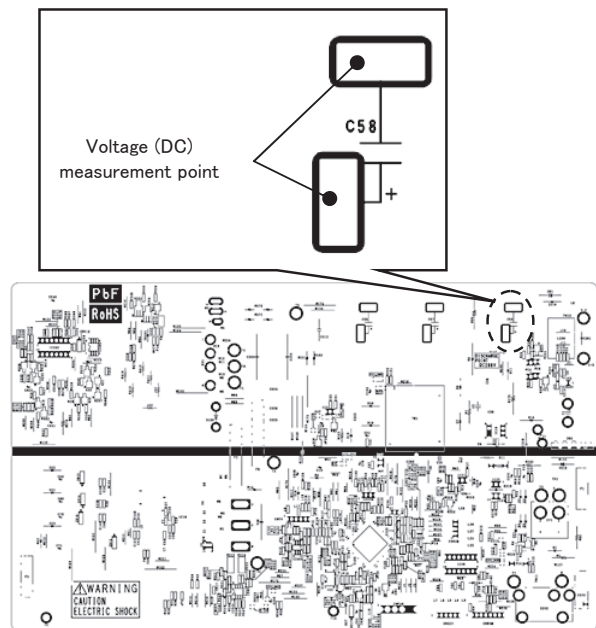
Voltage measurement point (Solder face of PCB (Main))
